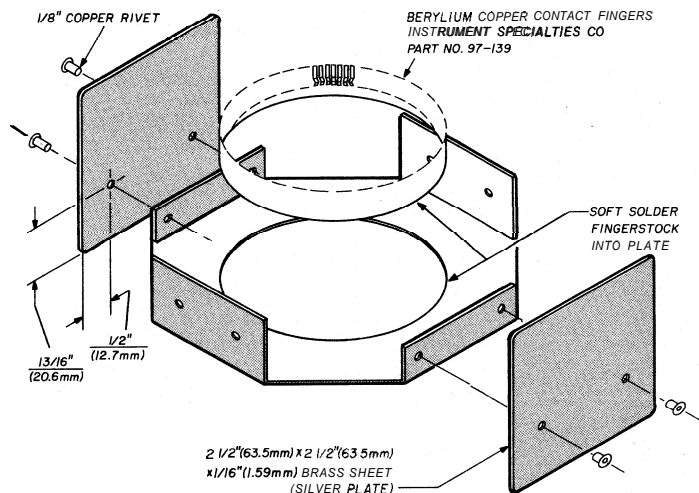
Anode collet and capacitor plate support assembly. The two fixed capacitor plates for C5 and C6 are mounted to the assembly using copper pop-rivets and then soldered. The two remaining bent-up edges are for mounting the blocking capacitors C3 and C4. The finger-stock is soft-soldered into the large hole in the center. A tight fitting aluminum disc helps to hold the finger stock in place while soft soldering with a hot plate.
